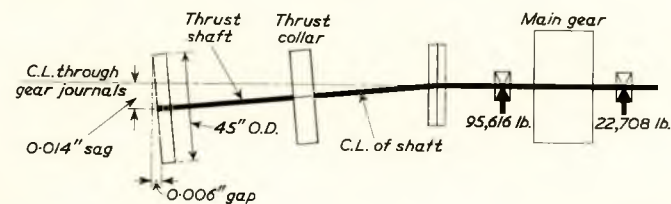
Gap and sag of bull gear and thrust shaft assembly
